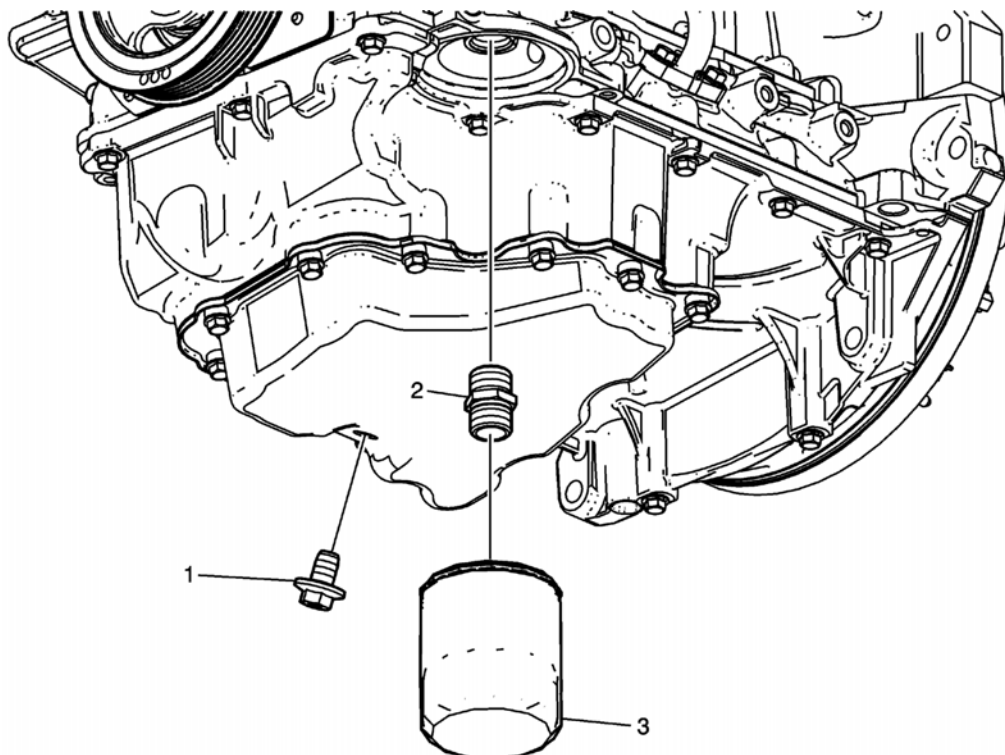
Oil Filter, Fitting Adapter And Drain Plug
